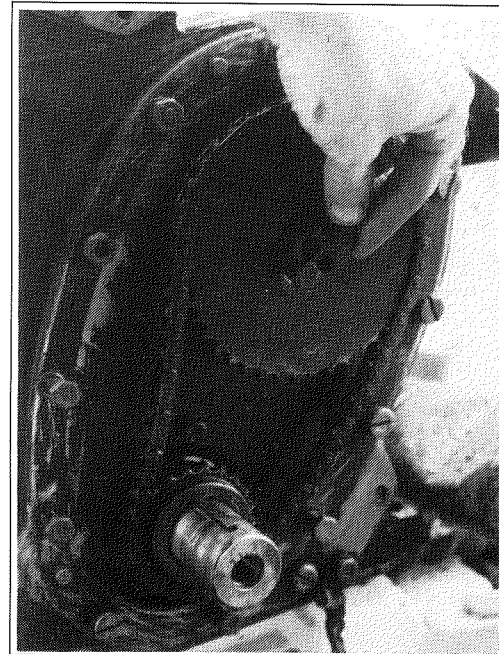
Make clear scribe marks on the top timing wheel and engine front plate to ensure its later replacement in exactly the same
